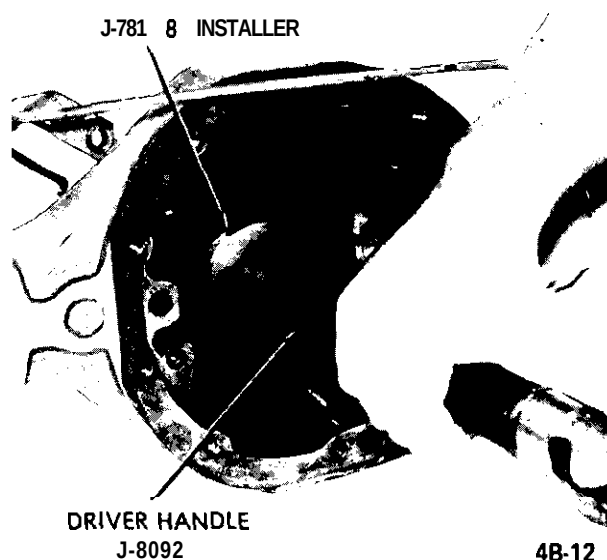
B-18 Installing Rear Pinion Bearing Outer Race
